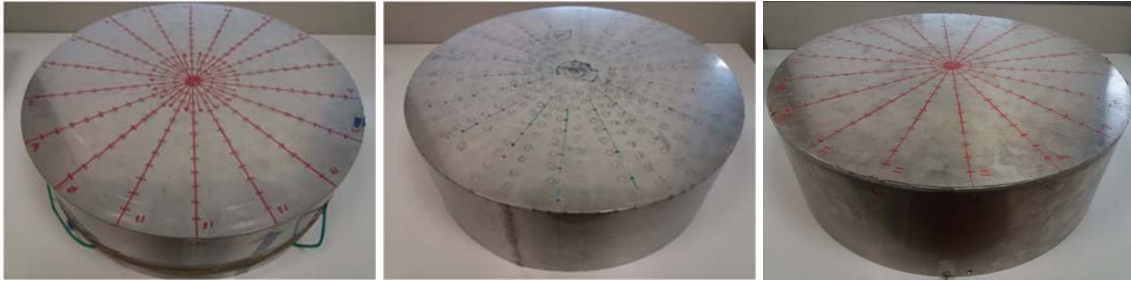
Plates under measurement. Steel plate with O-ring (left), steel plate without O-ring (centre) and aluminium plate with O-ring (right).
